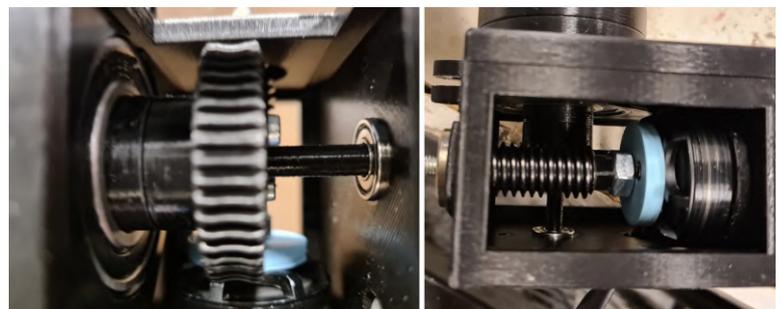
Worm wheel (left) and worm gear (right) to rotate the gripper.
